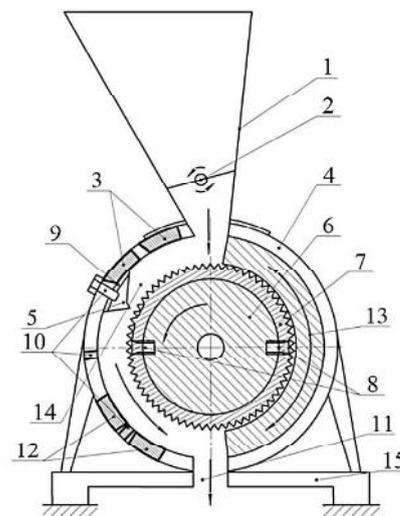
Scheme of a prototype rotary crusher: 1 – receiving hopper; 2 – damper; 3 – plugs in add. places of a loading window; 4 – a stator; 5 – cutting element; 6 – a rotor; 7 – a removable surface of a rotor; 8 – fastenings of a surface of a rotor; 9 – a lining for variation of a backlash; 10 – fastening and caps in add. locations of the counter-blade; 11 – discharge hopper; 12 – plugs in add. places of unloading; 13 – limiting lip; 14 – crushing chamber; 15 – frame.
